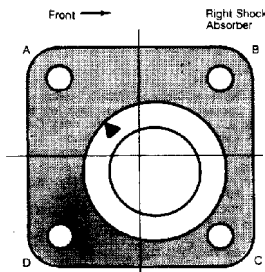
RX7 & 626 Caster & Camber Adjustment Using Strut Support
